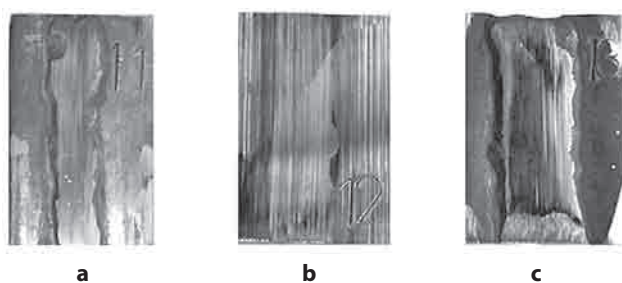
General view of tests carried out through wear testing after five cycles of wear testing (5 minutes), test 2: a – test 1-1; b – test 1-2; c – test 1-3.
